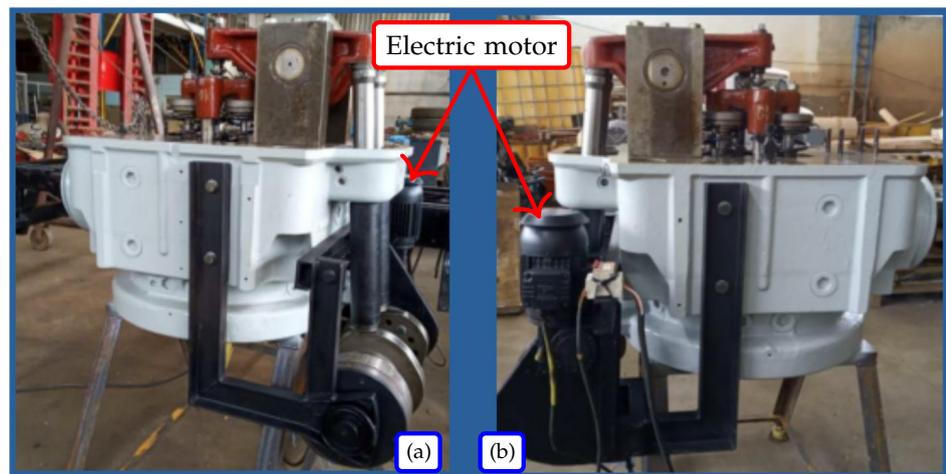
1/18 of Wärtsilä 18v46 Cylinder Head with adapted electric motor at the crankshaft—(a) left view—(b) right view.
